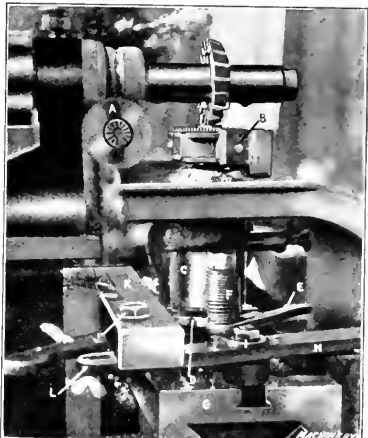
Milling Ratchet Teeth on a Gear Blank
